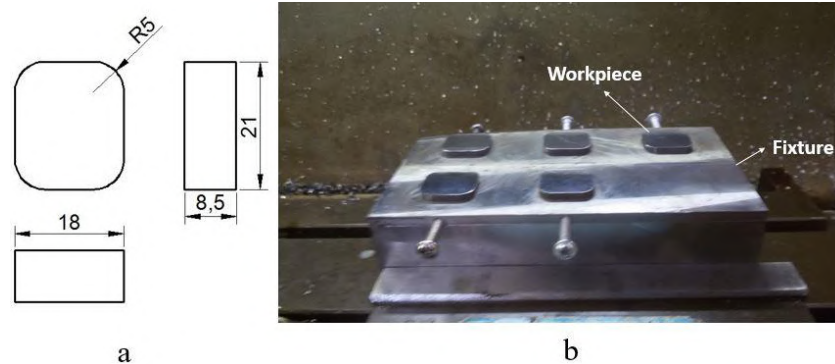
Test workpiece a) workpiece drawing, b) The workpieces mounted on the fixture
